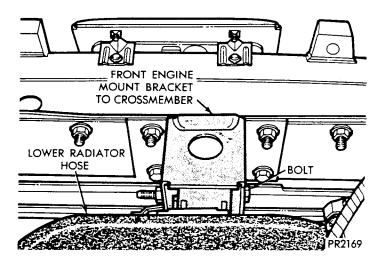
Remove Engine Mount Bracket from Front Crossmember
